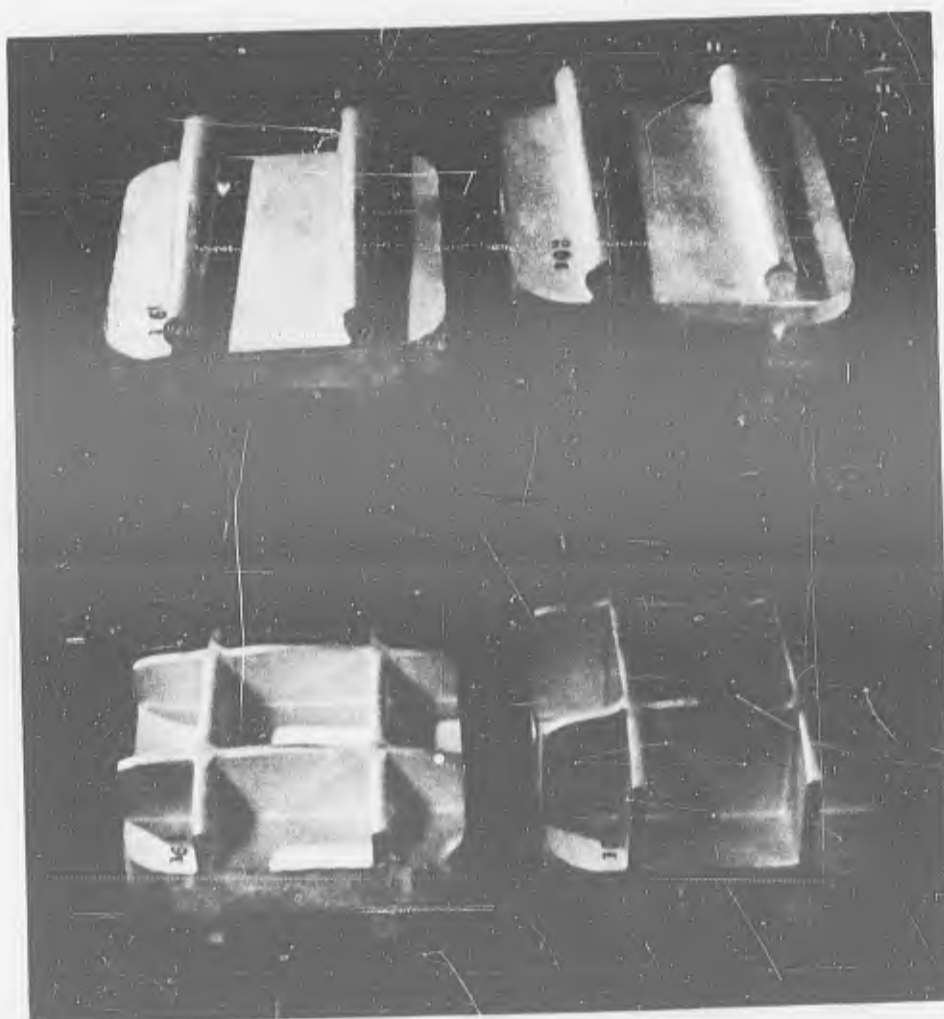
Upper and lower views of 7075 (75S) aluminum alloy forgings 31E (left) and 32E (right) made with the No. 1 insert assembly (see Fig. 7) and the round lifting lug punch (see Fig. 6). Extraction was satisfactory but produced slight distortion. (For forging details, see Table I, Nos. 4 and 5.)
